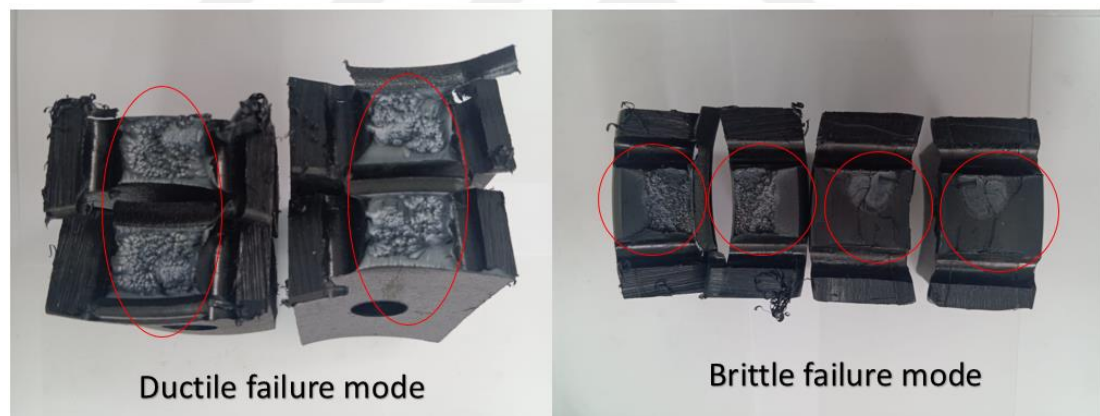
The ductile failure mode and brittle failure mode for butt fused HDPE samples
